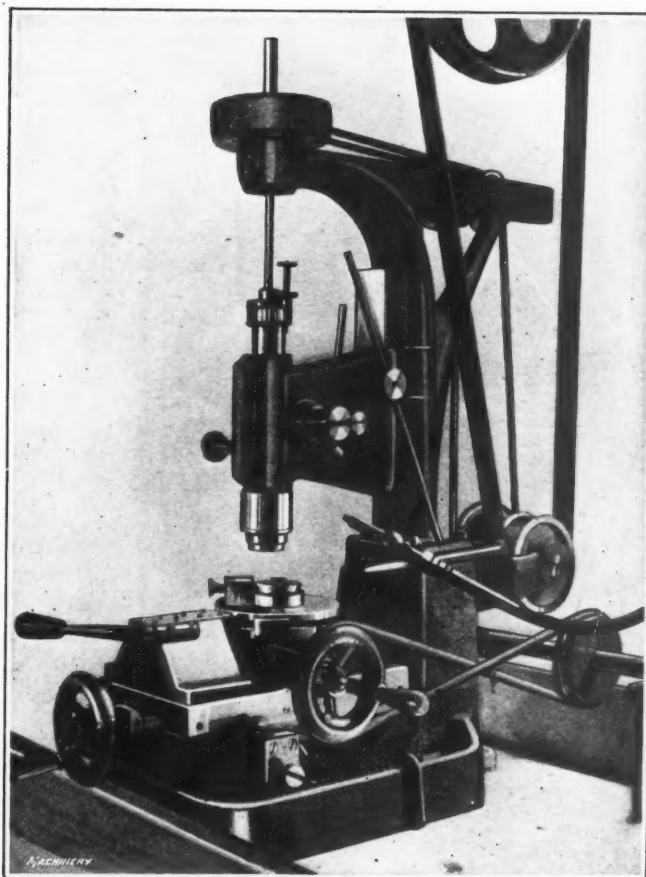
Leland-Gifford Bench Drilling Machine with Special Equipment for finishing Powder Train Groove
